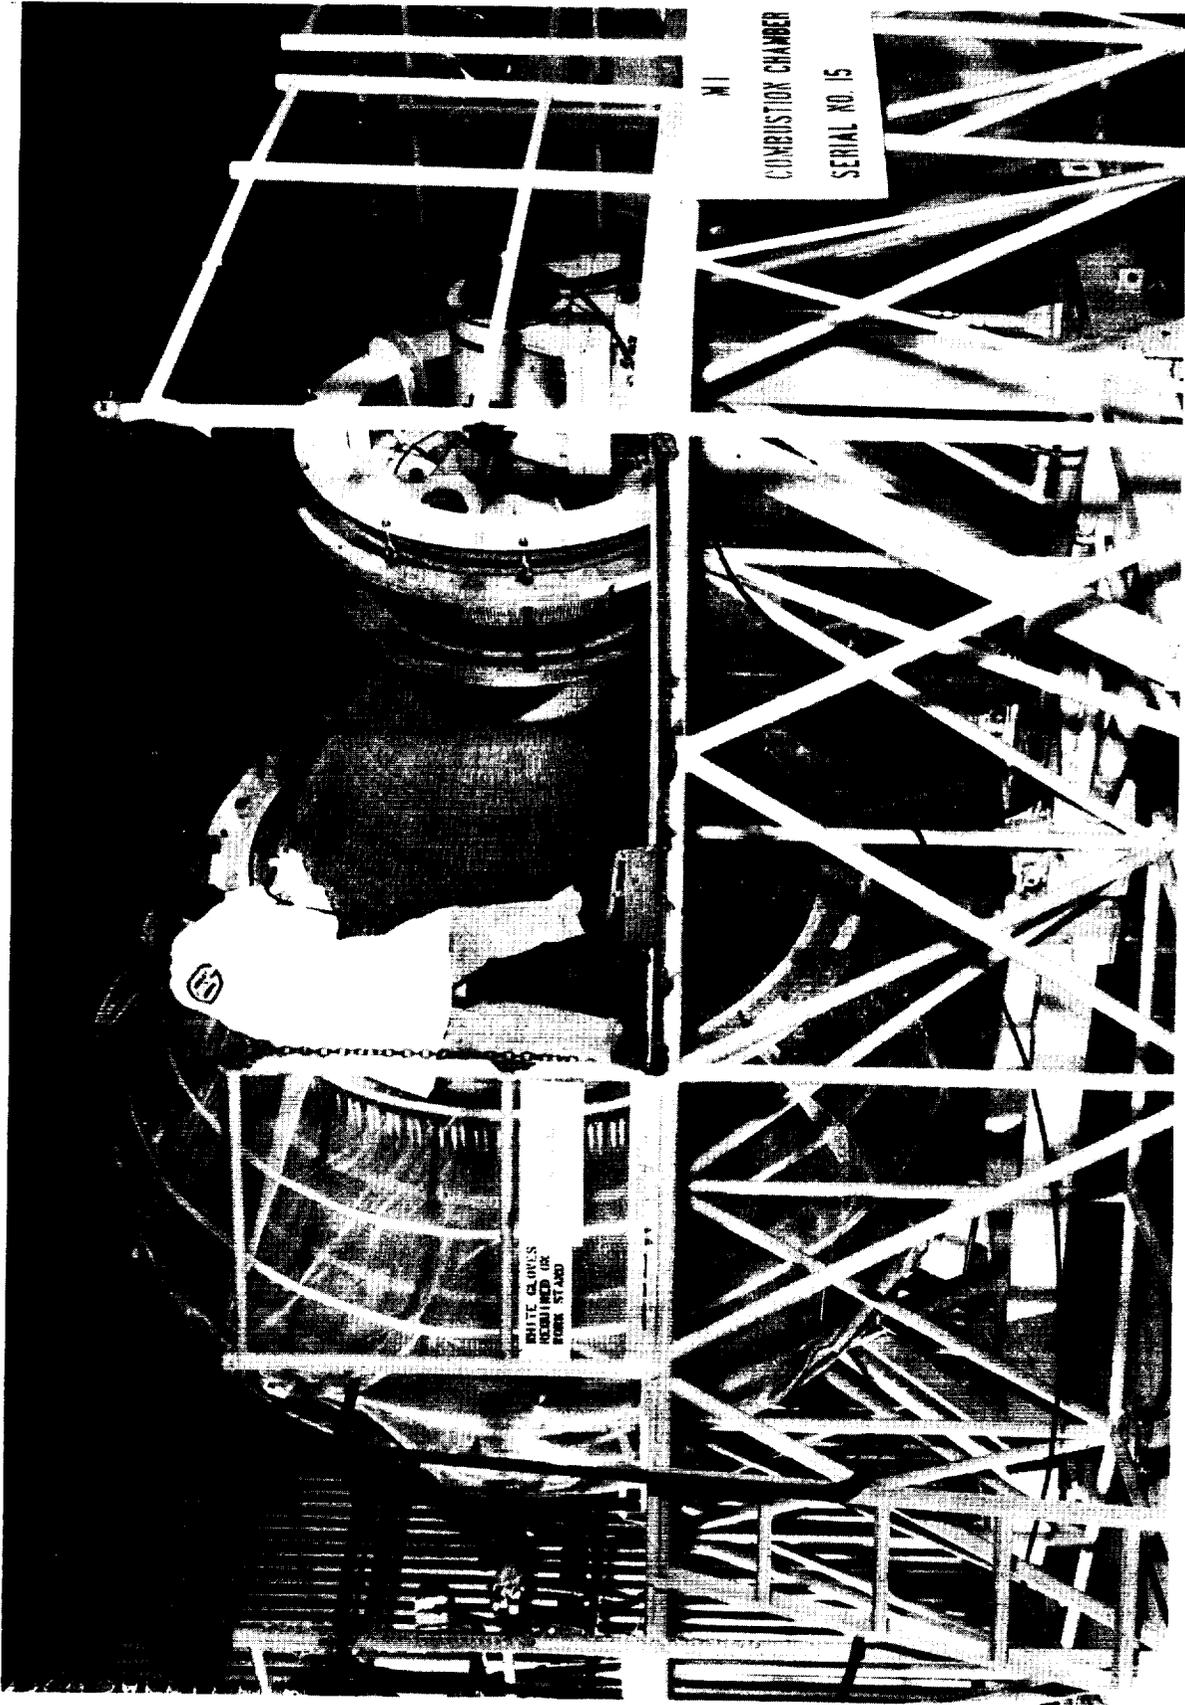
Welding of Tube-to-Tube Joints, S/N 015 Combustion Chamber
